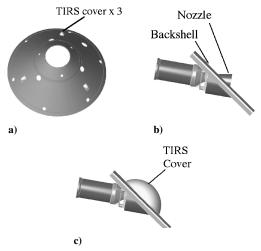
TIRS: a) isometric view of MER backshell and three TIRS locations, b) side view of TIRS extending outside of backshell, and c) TIRS cover attached to backshell (courtesy of JPL).
